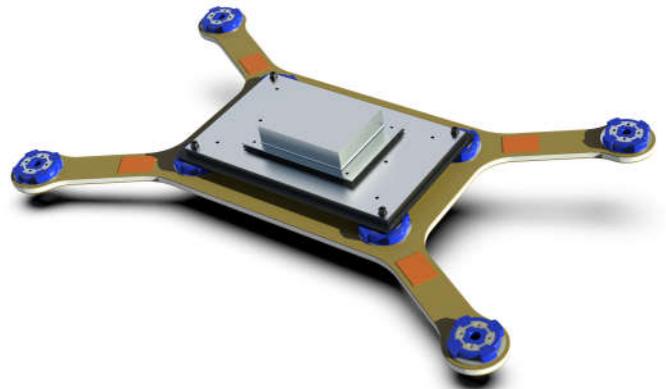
Assembled multi-functional sandwich panel with payload (thermal experiment and control unit inside housing).
